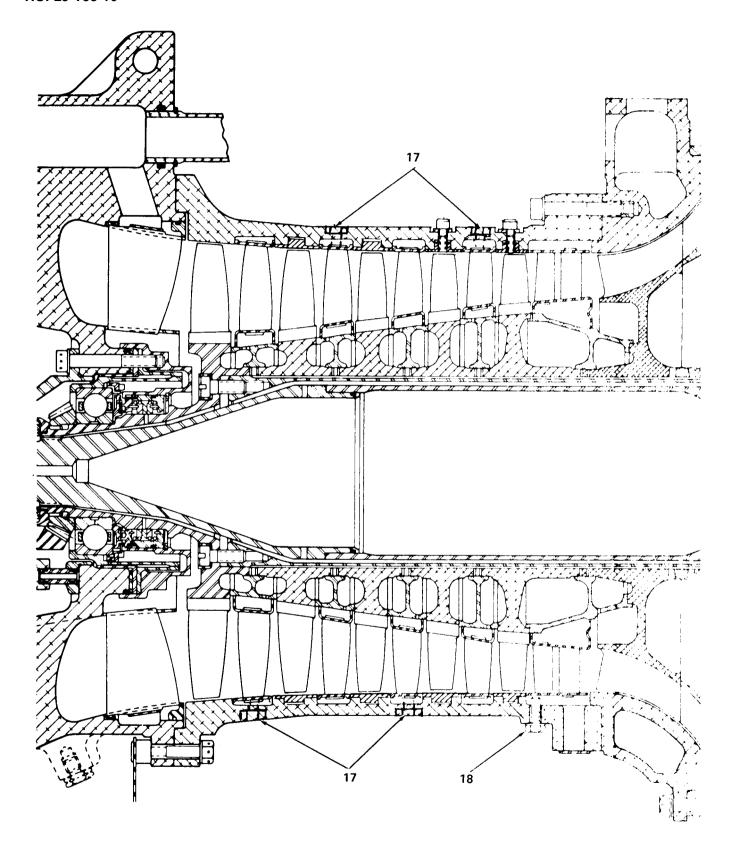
Special Torque Value Locations (T53-L-11 Series Engines) (Sheet 3 of 6)
